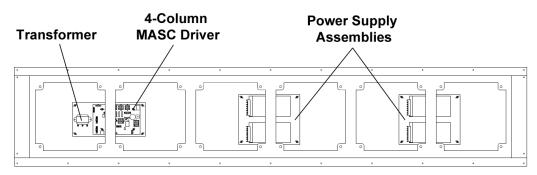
Discontinued 8x48-46mm Display with Modules Removed
